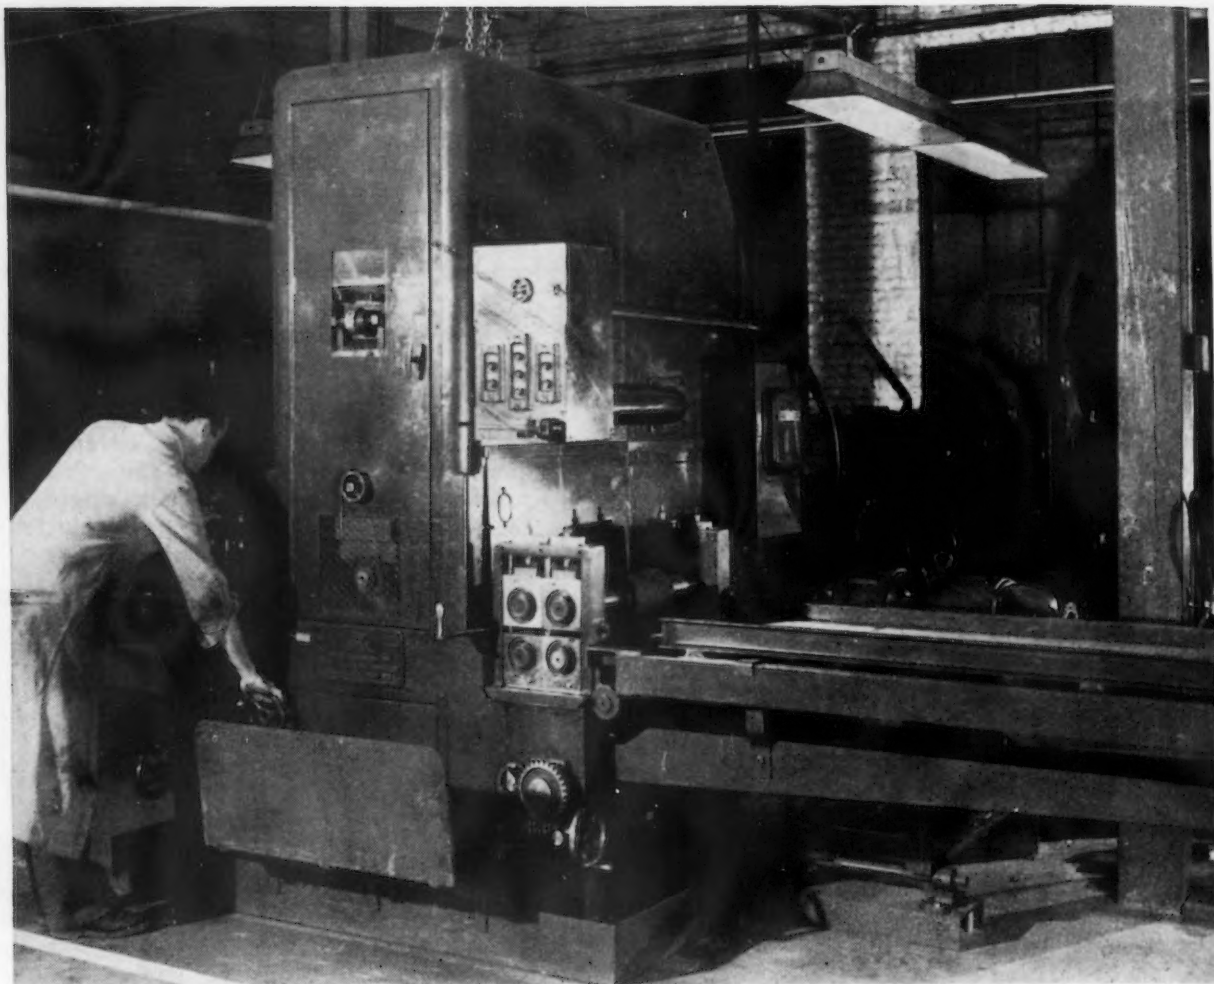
Machine developed for stainless sheet three-step polishing, using coated abrasive belts.
